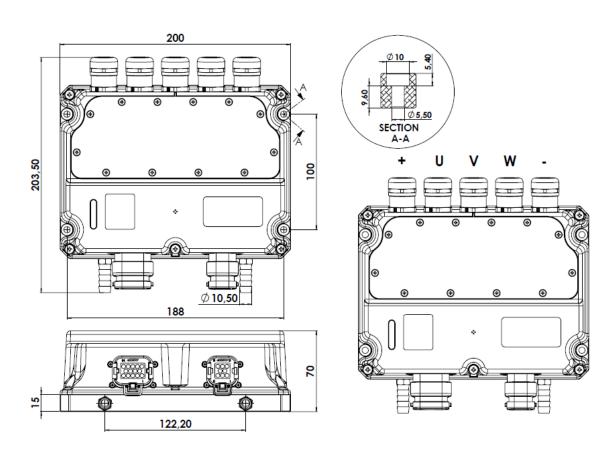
emDrive H100 Liquid cooled version dimensions and connection order
